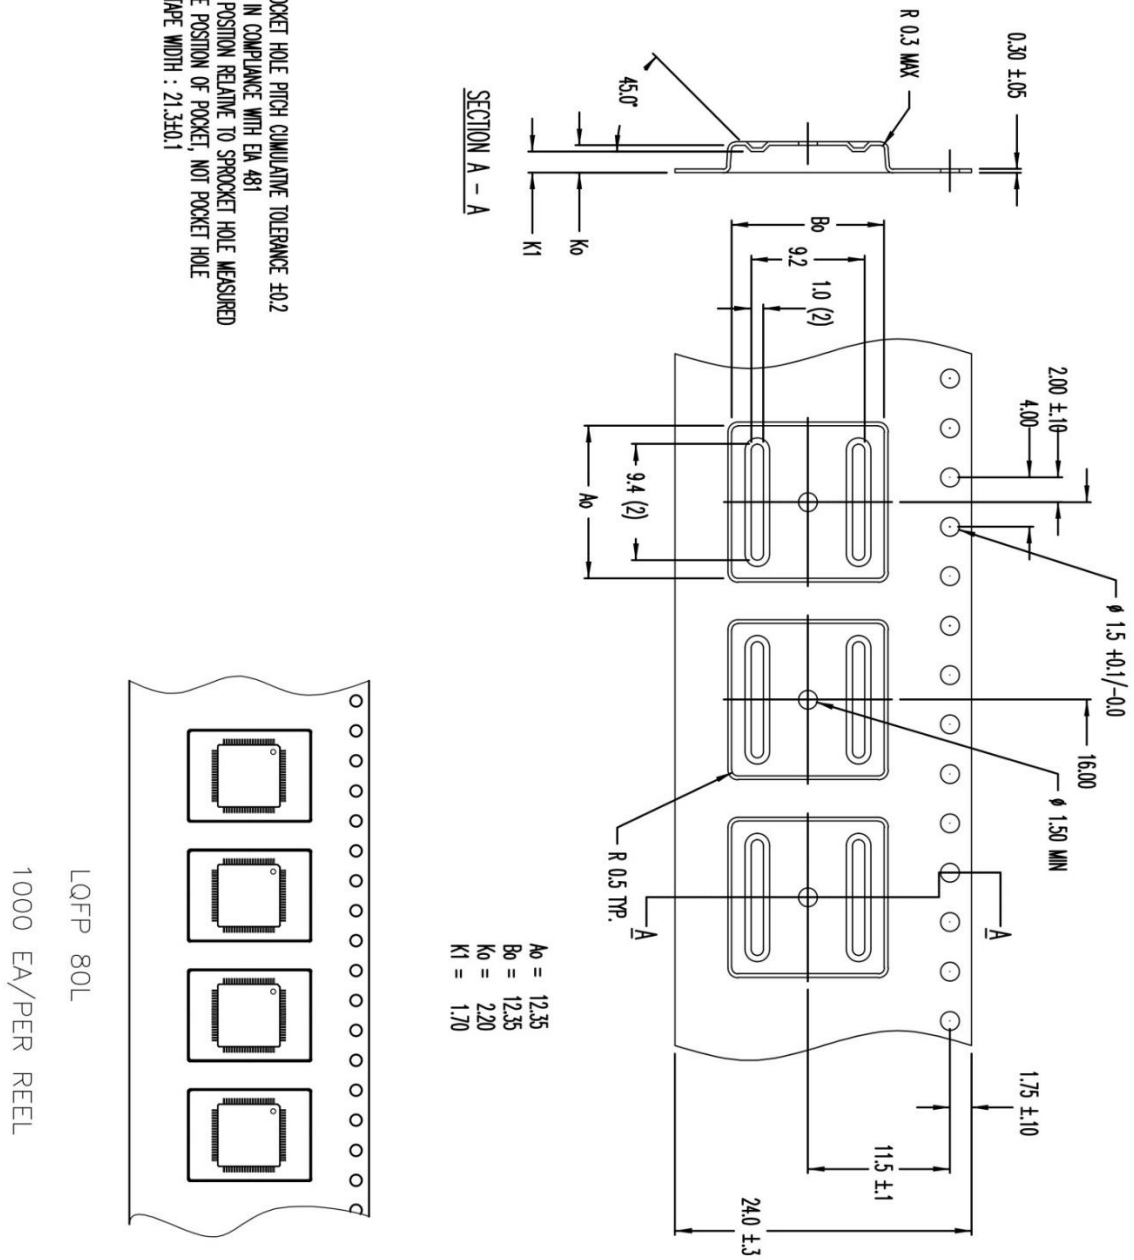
FT905L, FT906L, FT907L, FT908L Reel Dimensions
